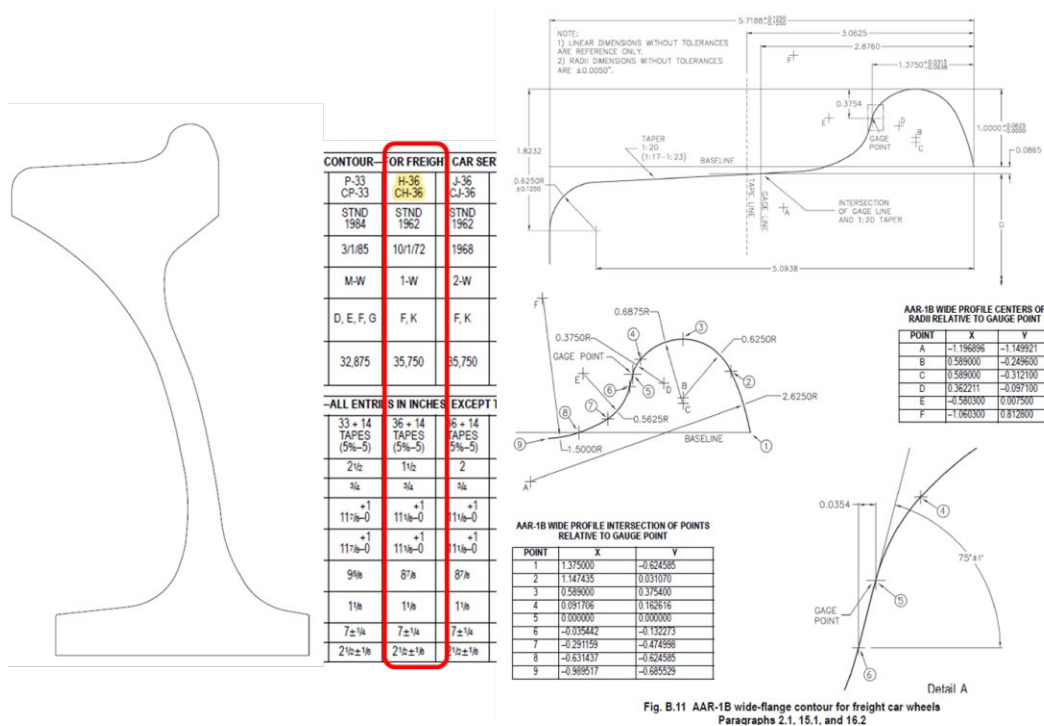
Schematic of wheel selection and cross section of 36" wheel [27]
